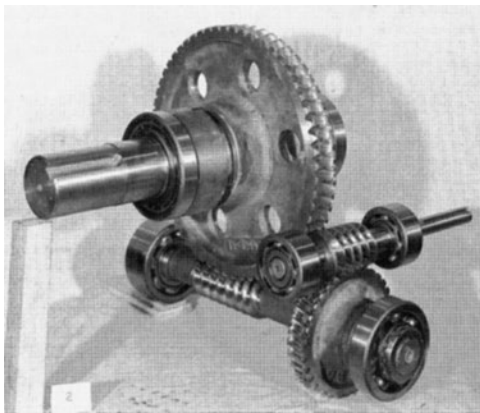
Two stages of cylindrical worm gears. (Courtesy of Hamilton Gear and Machine Co., Ltd., Hamilton, Ontario, Canada.)
